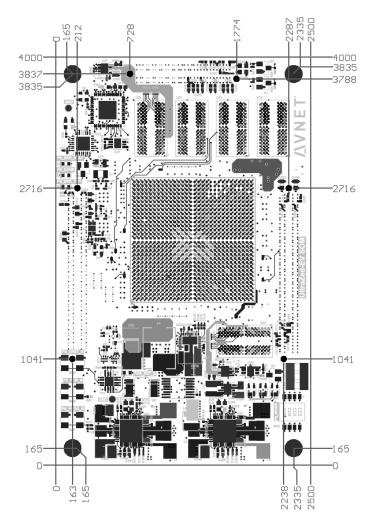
UltraZed-EV SOM Top View Mechanical Dimensions (mils)
